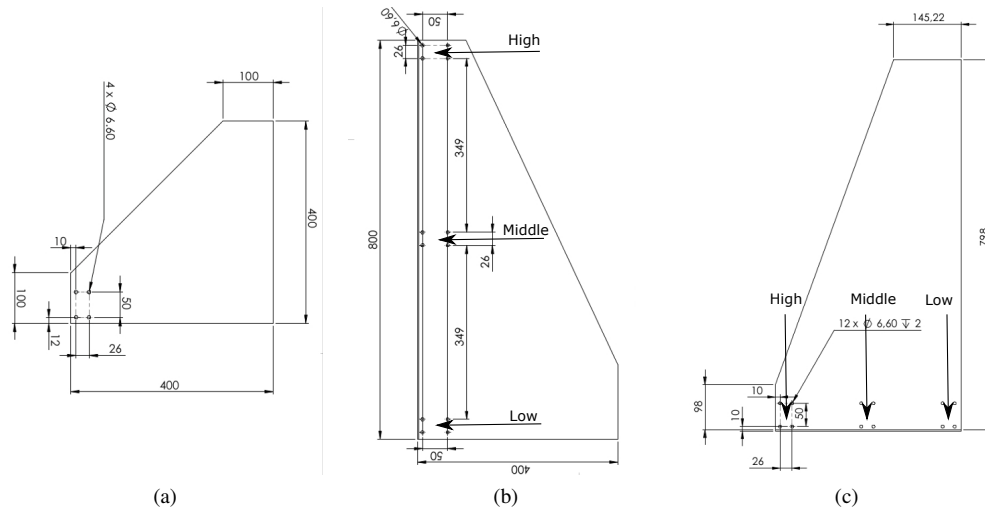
Drawings of the wing sections used in the tank tests. (a) Type 1 and 1-bis. (b) Type 2. (c) Type 3.
